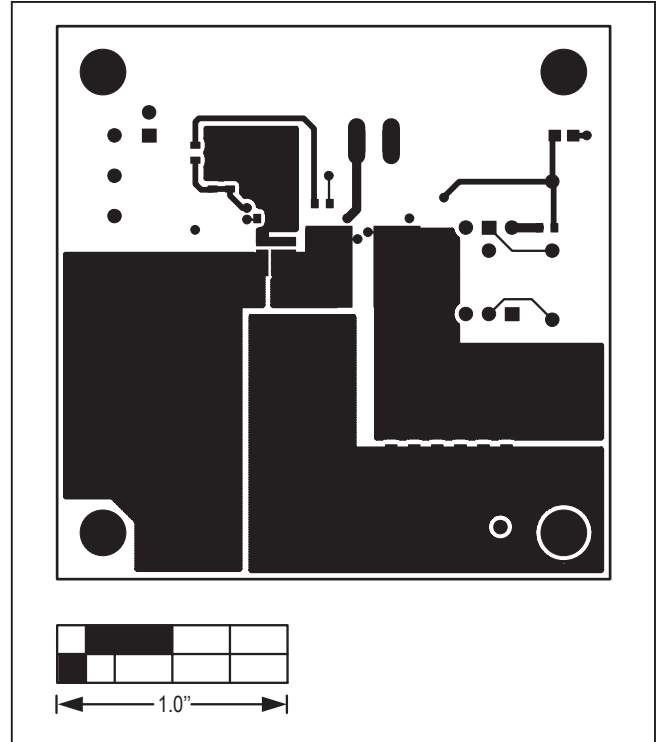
MAX17016 EV Kit PCB Layout—Component Side
